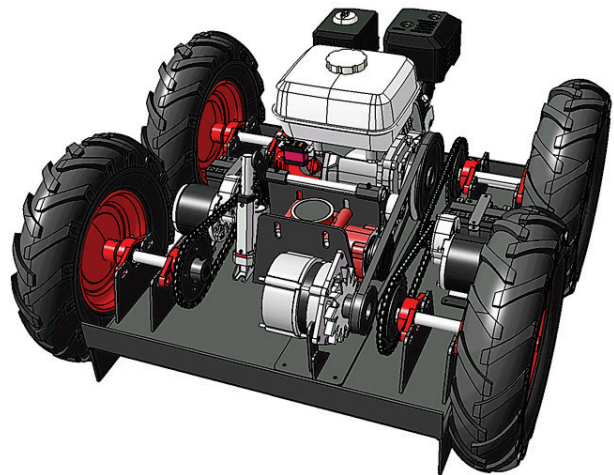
3D model of the assembly of the hybrid robotic lawnmower
